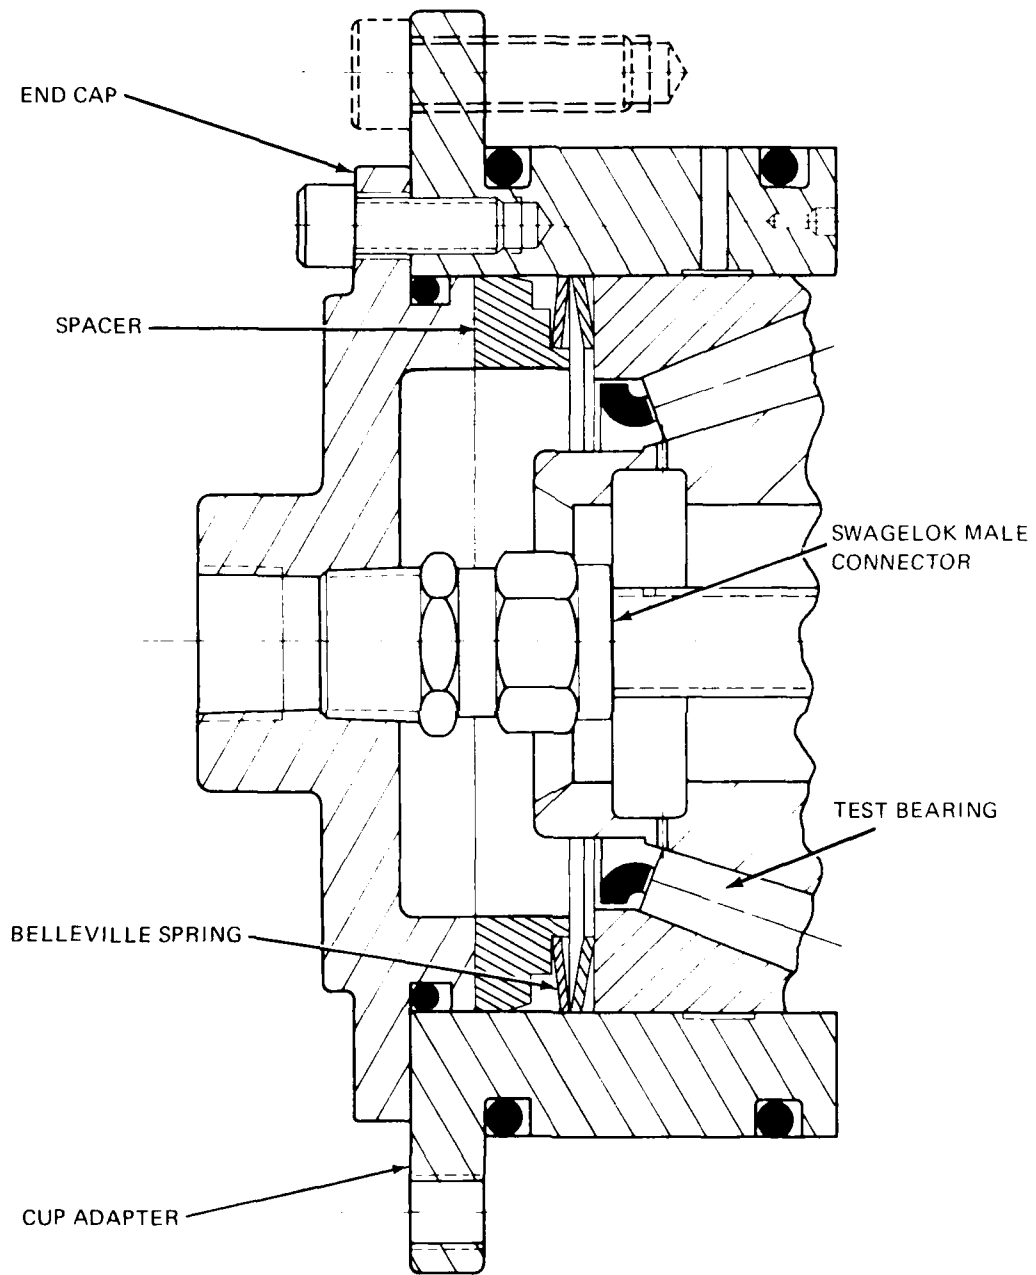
Thrust Load Subassembly for Oil-Off Test.
